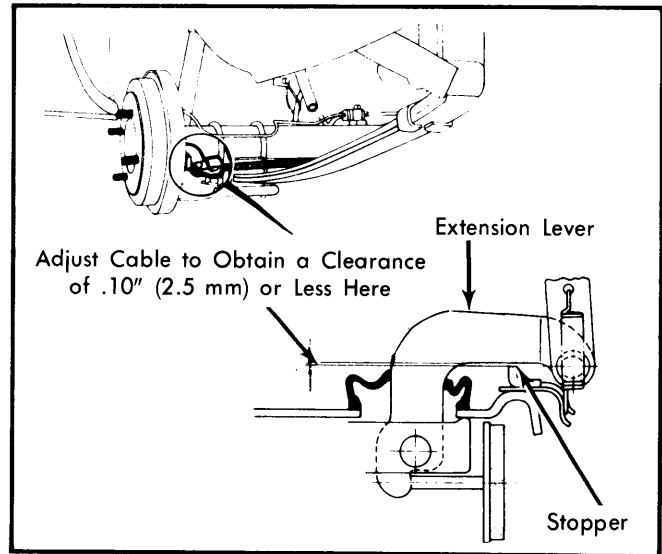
Adjusting Parking Brake on Challenger, Sapporo and Colt St. Wgn.
